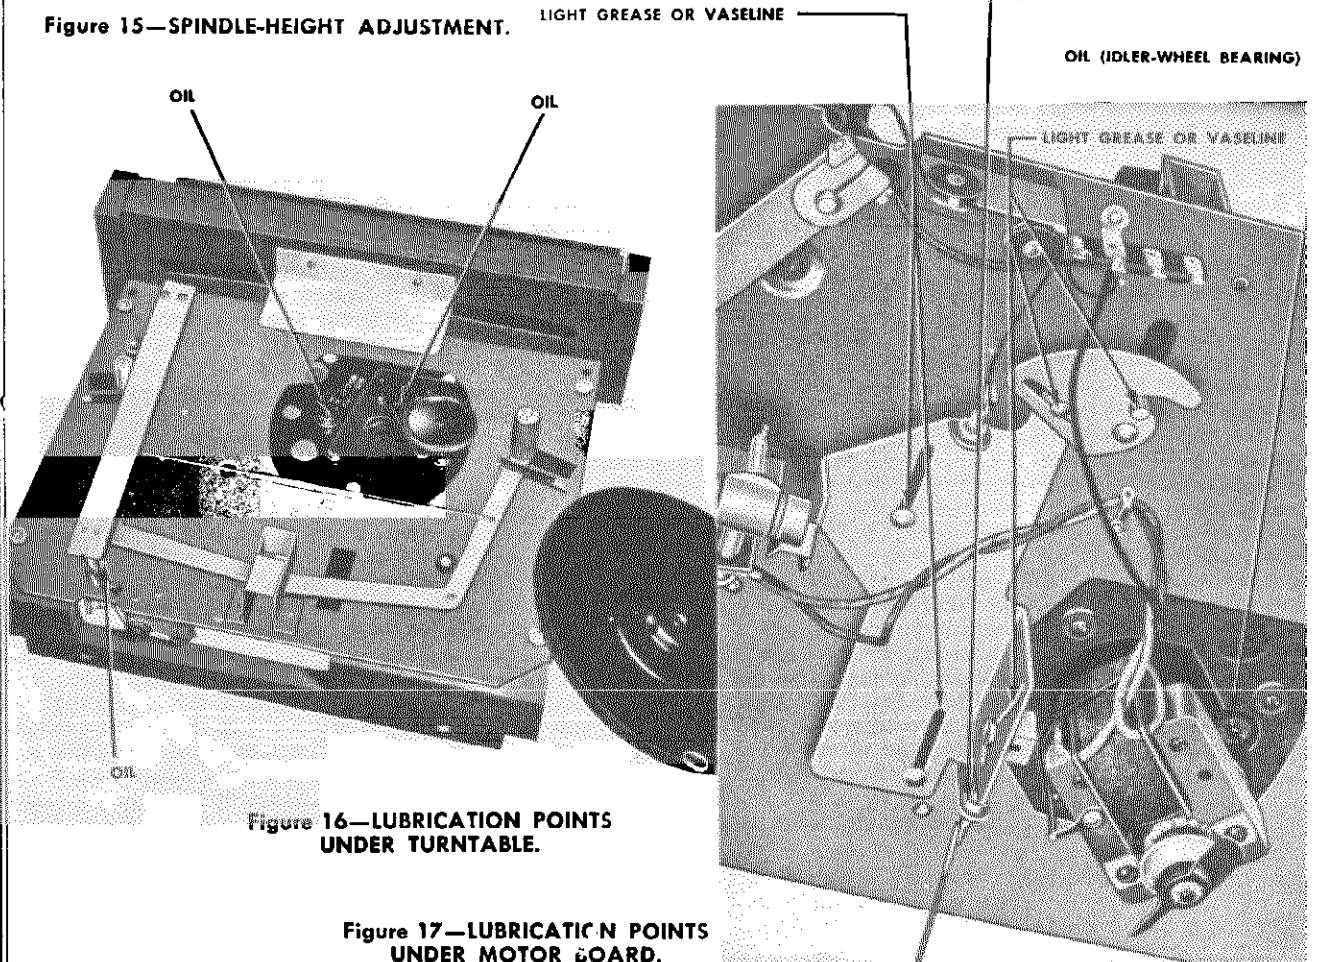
LUBRICATION POINTS UNDER TURNTABLE.
